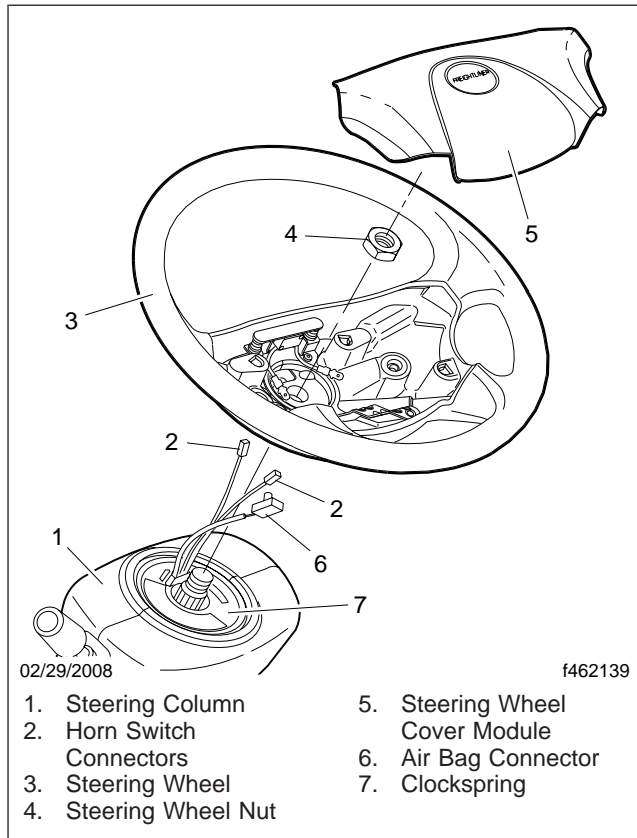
, Steering Wheel Cover Module and Connectors, Air Bag
